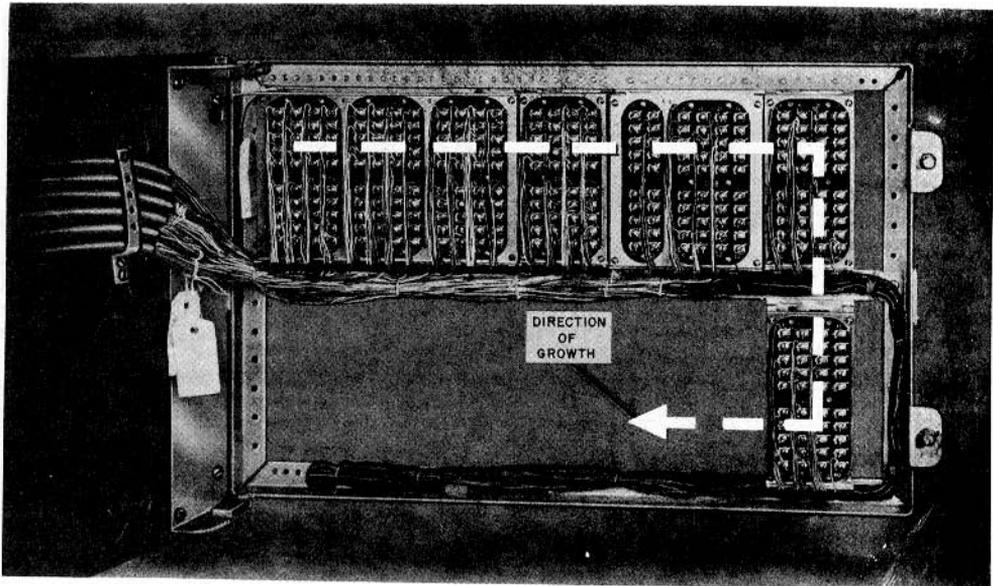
Key Cables Run Directly to Apparatus Mounting
